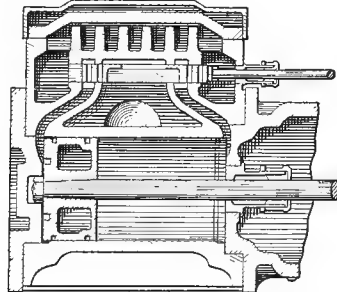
Chandler & Taylor double-ported slide-valve.
